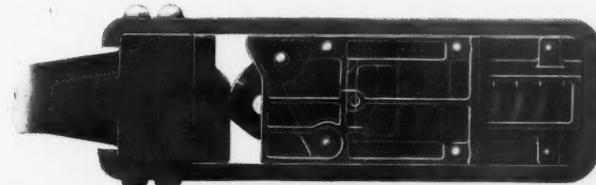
McCord Draft Gear Showing Position of Lever and Spring When Under no Load.
